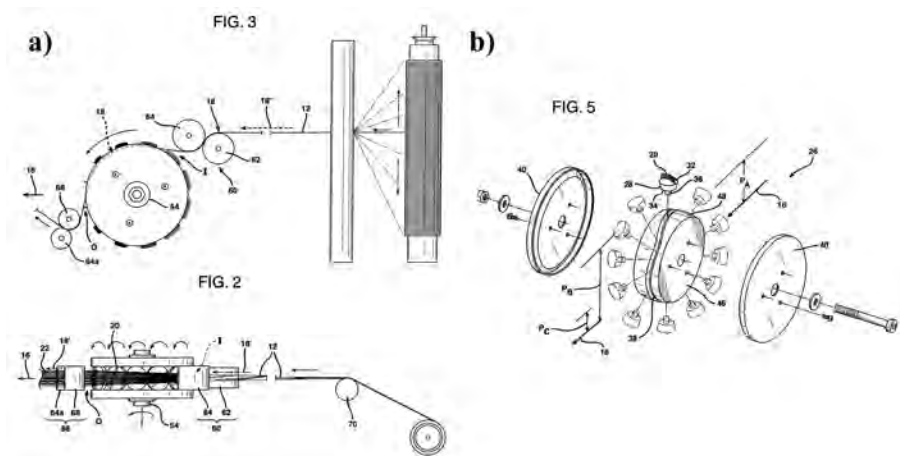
Schematic of the mechanical tow spreading machine [31]. (a) Side and top views (b) Detail of the rotation wheel with teeth.
